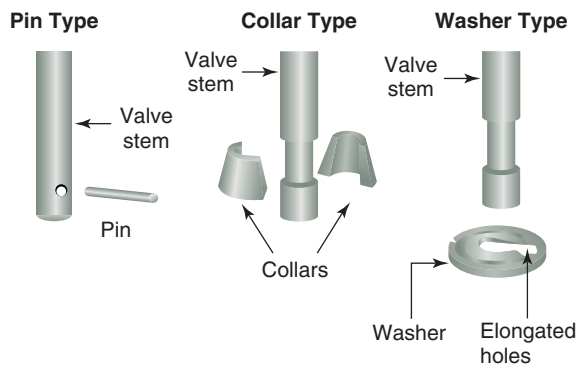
Three types of retaining methods used in power equipment engines. The collar-type and washer-type retainers are the most popular.
